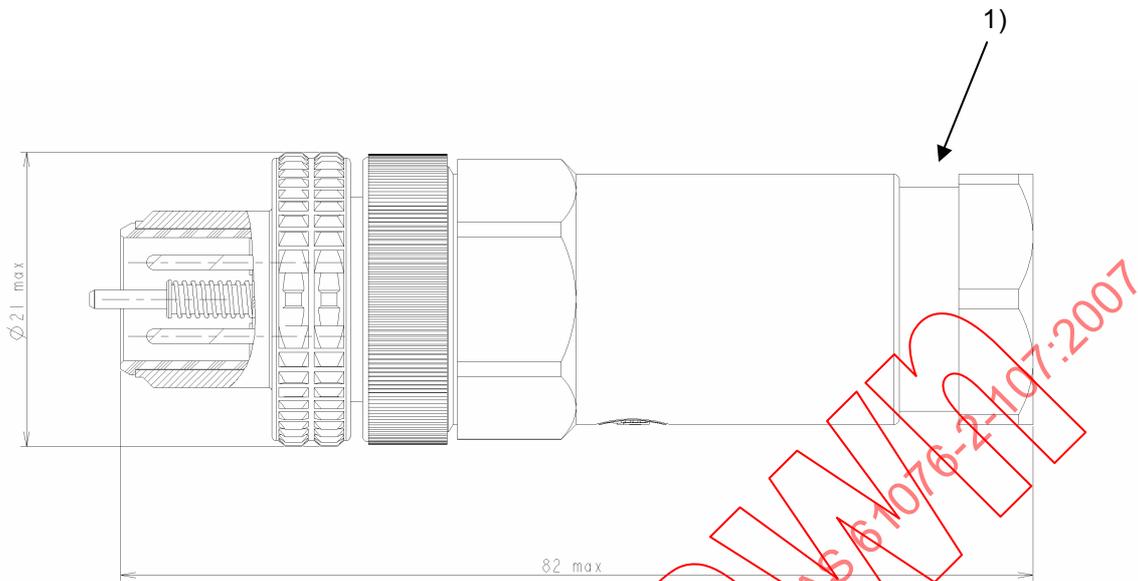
Fixed connector, electrical female contacts, for feed through, single hole mounting thread M16 × 1,5
